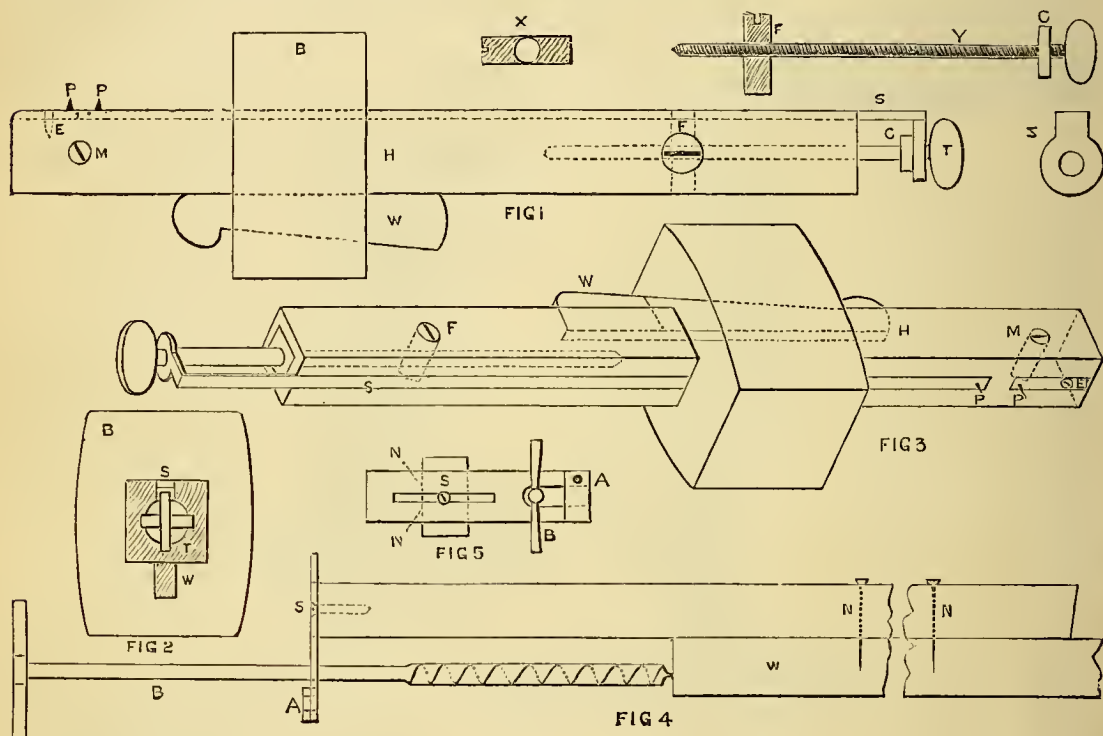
SIDE VIEW OF MORTISE GAUGE. FIG. 2.—TRANSVERSE SECTION THROUGH BLOCK. FIG. 3.—PERSPECTIVE VIEW OF GAUGE COMPLETE. References to Letters in Figs. 1, 2, 3: T, Thumbscrew; S, Slide; P, P, Marking Points; B, Block; W, Wedge; F, Fixed Screw; M, Single Marking Point; I, Small Brass Plate sunk in Wood to prevent wearing; C, Collar to keep Slide right; H, Staff; X, Form of Fixed Screw, F; Y, Form of Thumbscrew, T, with Fixed Screw, F, on; Z, Form of Collar, C. FIG. 4.—BORING GAUGE, SIDE VIEW. FIG. 5.—PLAN, SEEN FROM TOP. References to Letters in Figs. 4, 5: A, Auger; S, Slide Screw; N, N, Nails for Fixing to Board; W, Thin Wood; A, Stop.
